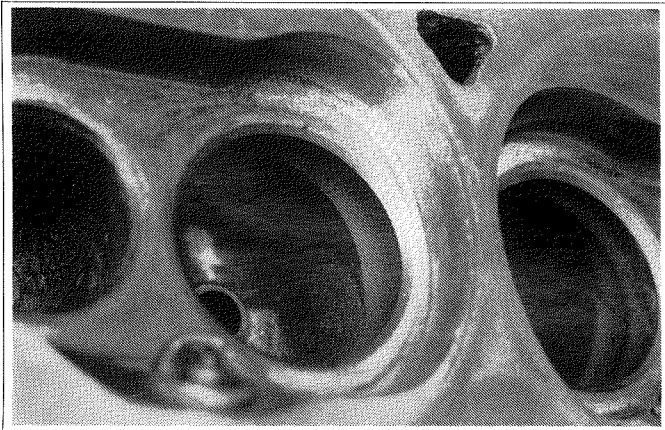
Inlet ports. Note the ridge between the cast port and the port machining, the casting marks, and the deep hollow that is sometimes too deep to remove by grinding.
